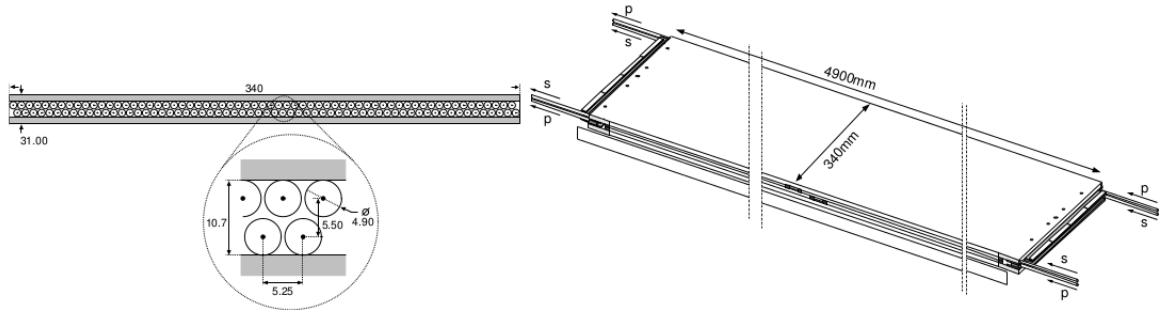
LHCb Outer Tracker. Left: cross section of a straw-tubes module. Right: overview of a straw-tubes module design [52, 72].
